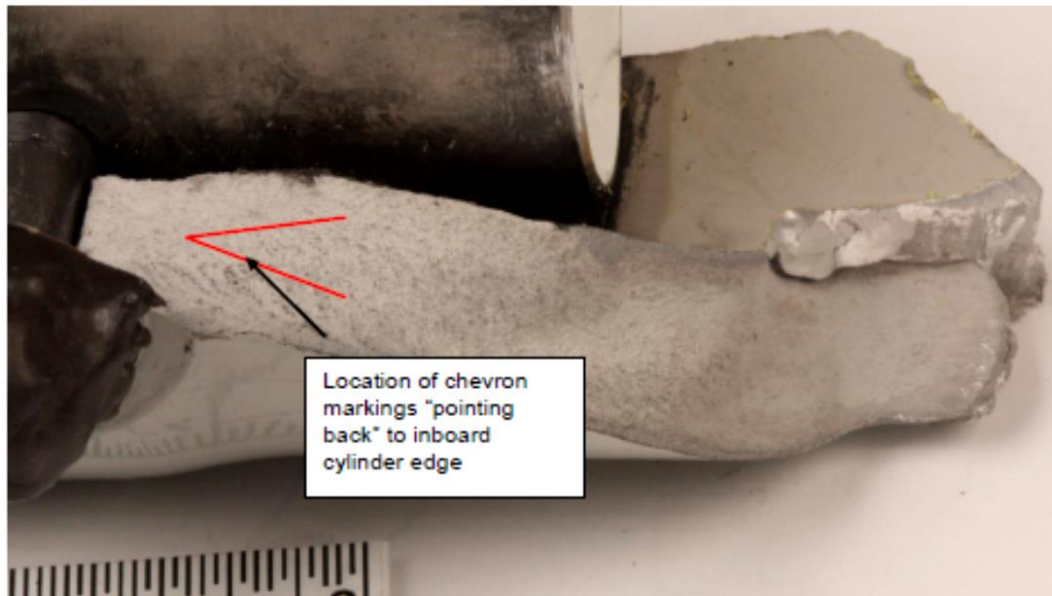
Showing fracture surface 'A1' in detail.
